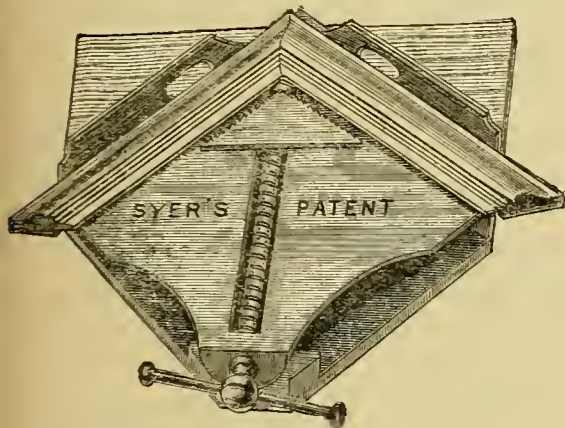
SYER'S UNIVERSAL MITRE CRAMP.
